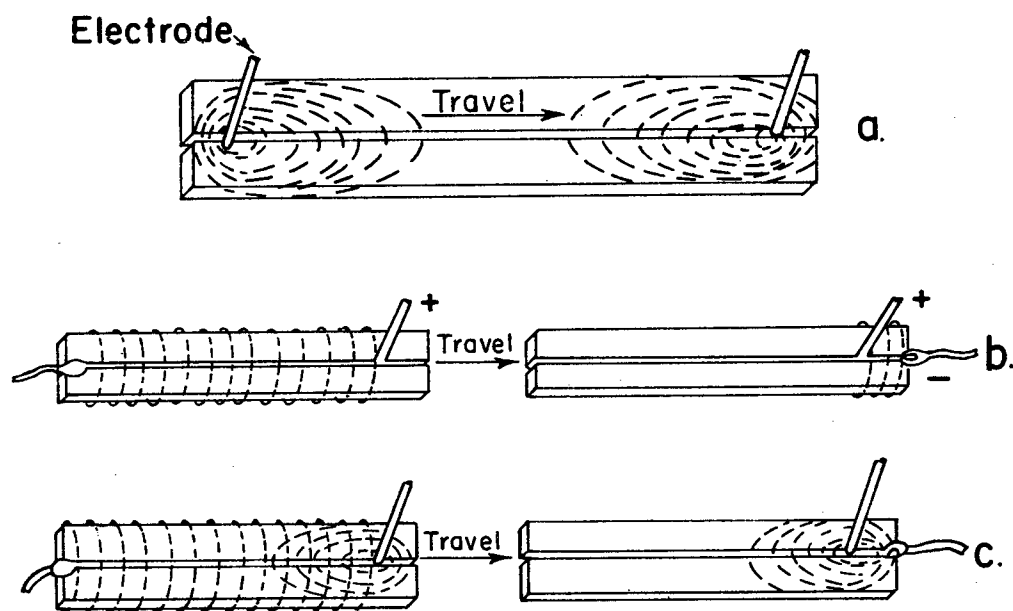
MAGNETIC FIELDS AT START AND END OF WELD
